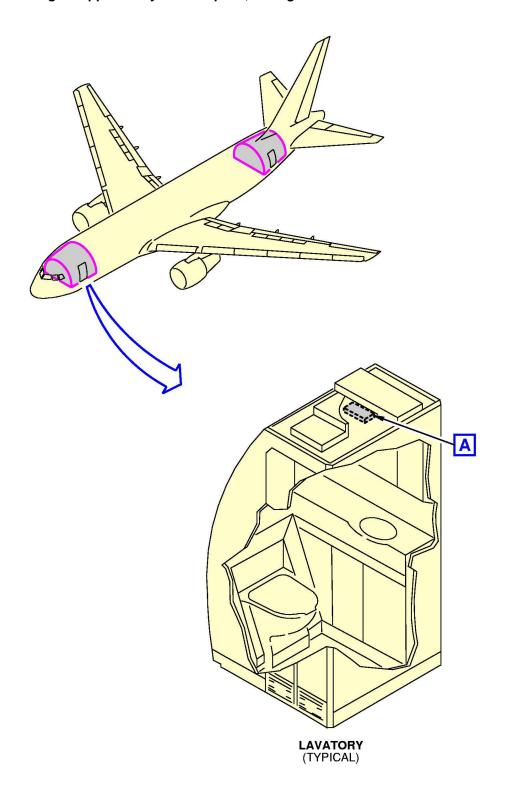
PASSENGER CABIN LAVATORY SMOKE DETECTOR INSTALLATION (SHEET 2 OF 2)
